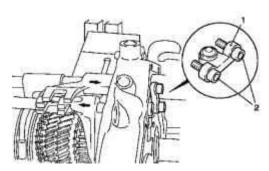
Removing the bridge clamping bolt back cover: 1 - Bridge 2 - bolts fixing
